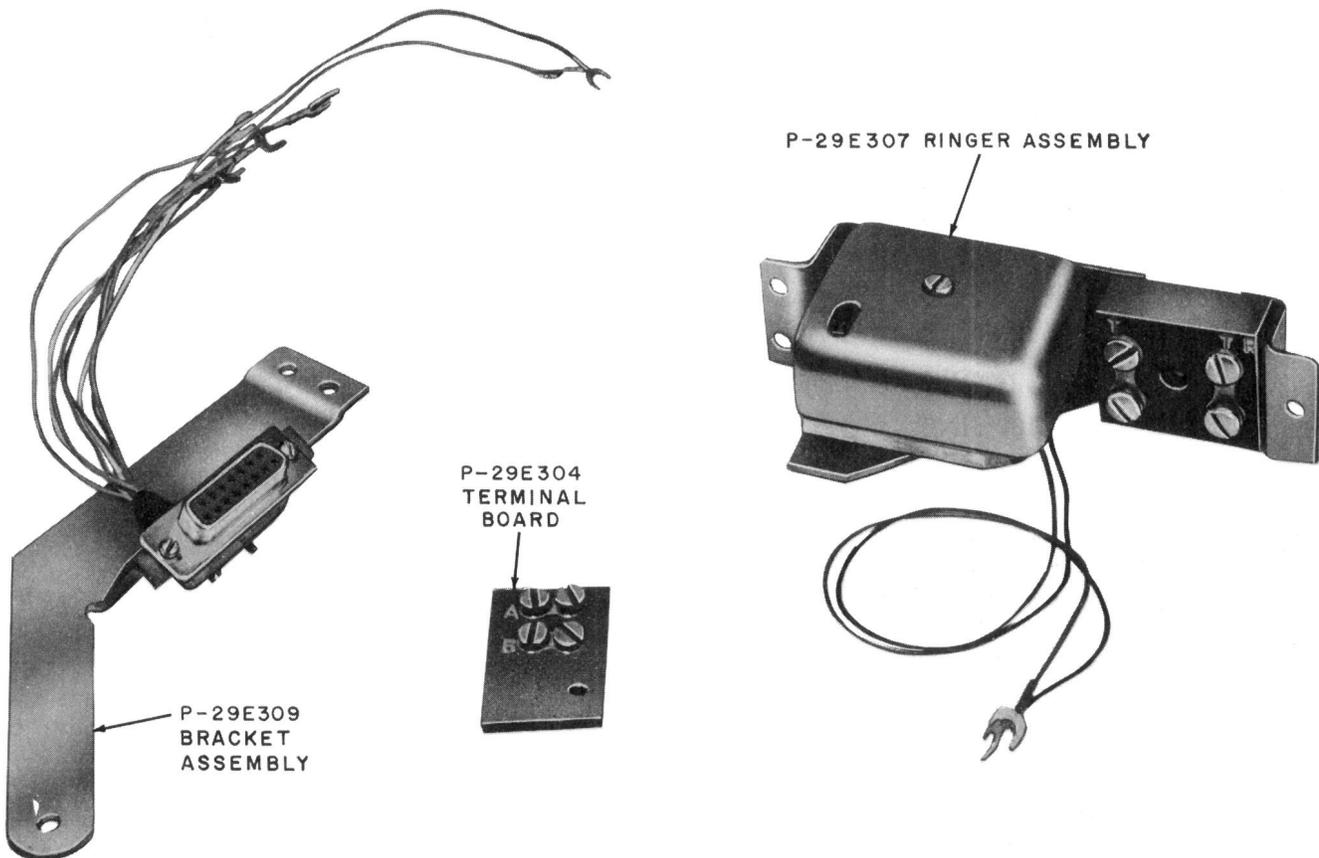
D-180120 Kit For Modification of Blackplate Assembly
